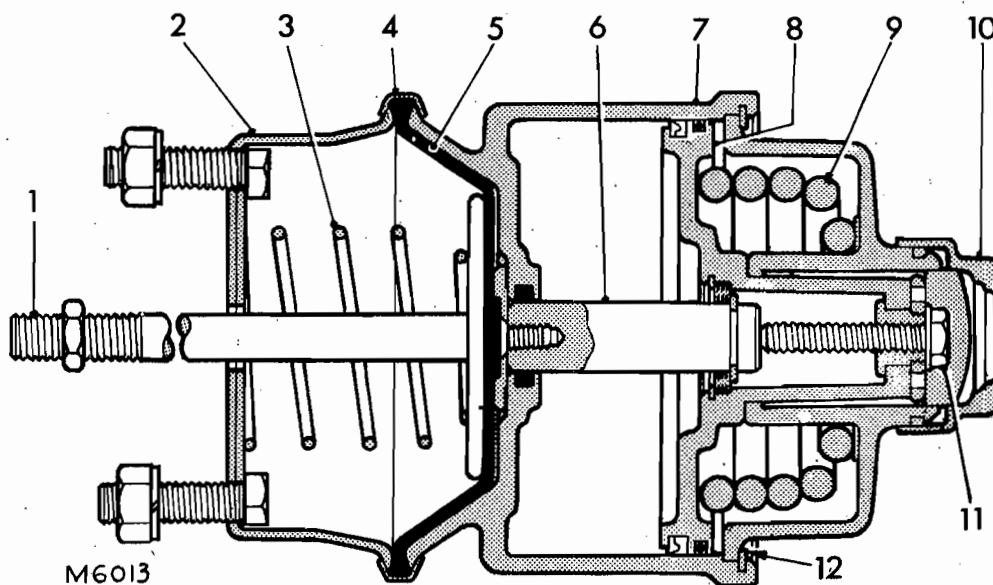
TYPICAL SPRING BRAKE ACTUATOR
